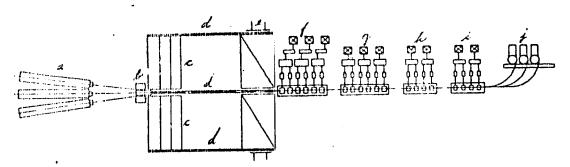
A layout of the equipment in the shop producing rolled wire of 10-20 mm diameter from 140 x 140 mm billets made by continuous casting on a conveyor-type installation: (a) three installations of continuous casting; (b) gas cutter and shears (right and left); (c) pull-off transfer; (d) roller conveyor; (e) continuous furnace with pushers; (f) reduction group; (g) roughing; (h) semifinish; (i) finishing group; (j) coilers.
